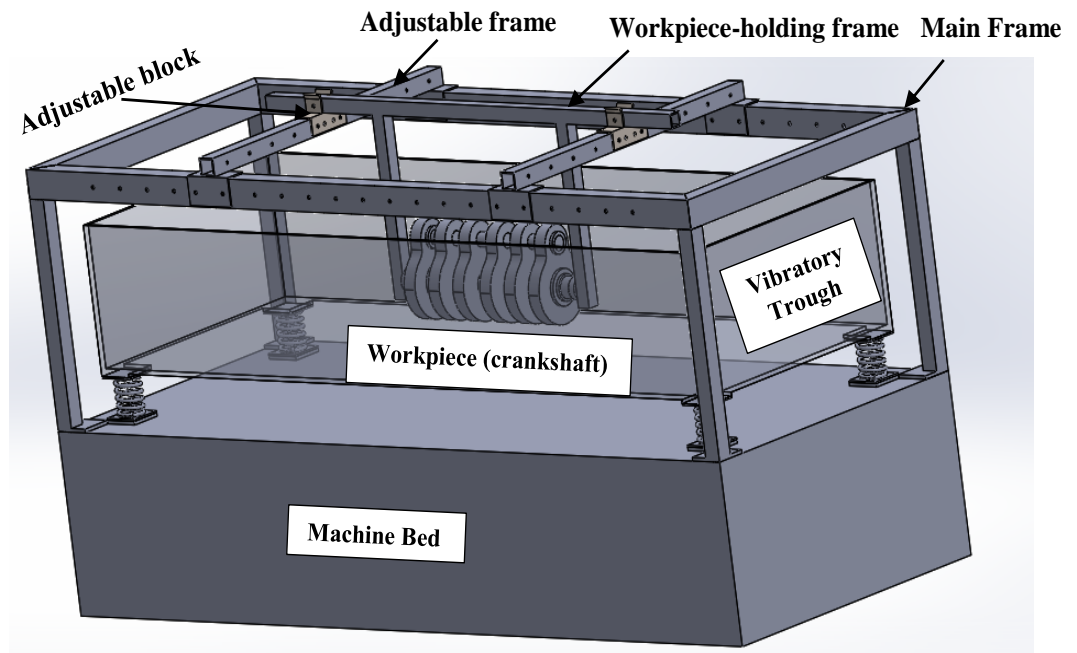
Jig arrangement system assembly fixed on the vibratory machine bed
